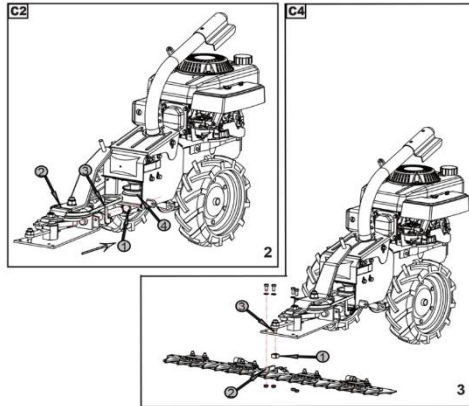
and C4 shows the chassis of the mower on which the mower bar must be mounted. To mount the mower bar on the chassis of the machine, the drive rod 3 must be positioned in the middle of the chassis.
